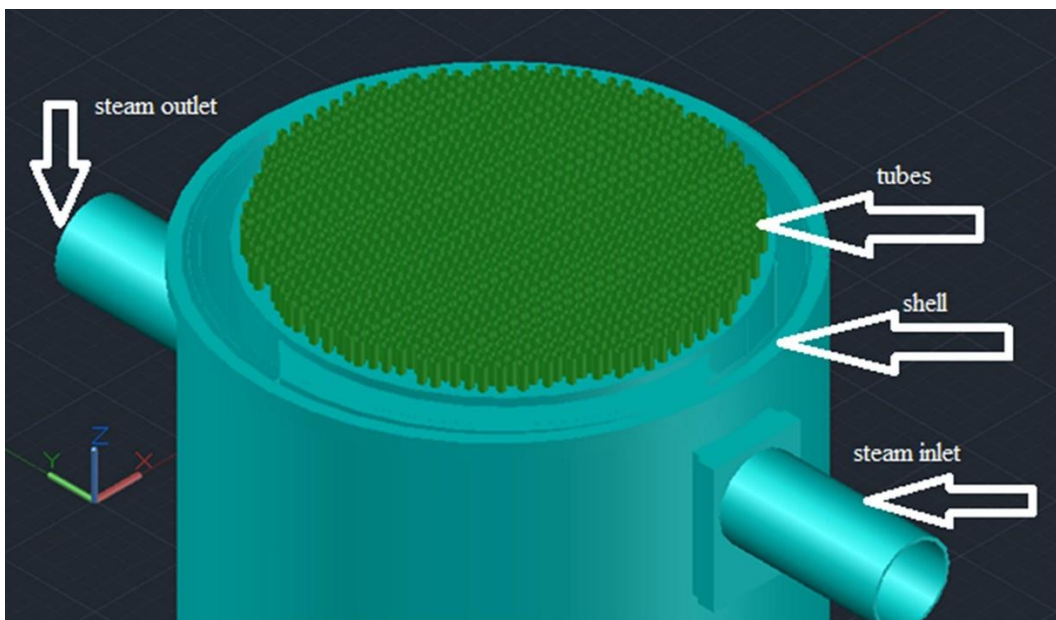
Tubes drawn in shell with nozzles for inlet and outlet of water heater.
